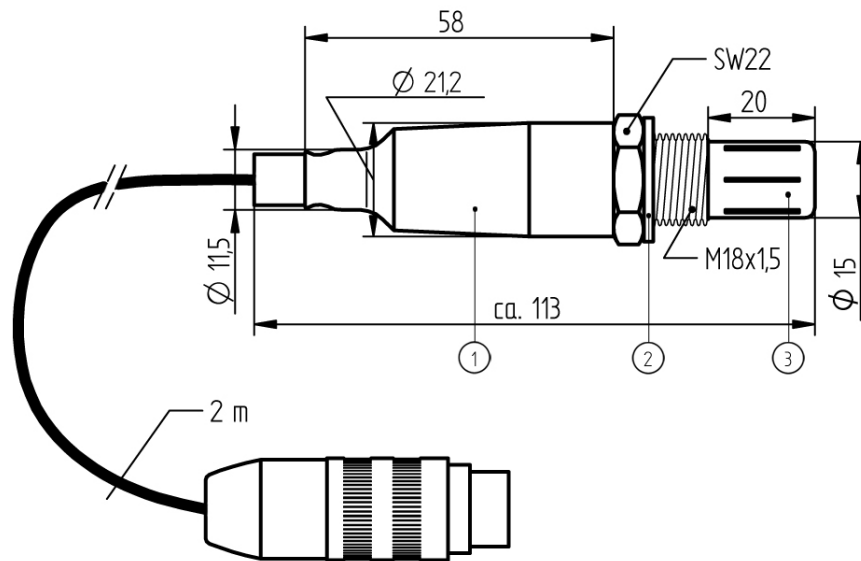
Dimensional drawing KS1D Combination Probe without housing
